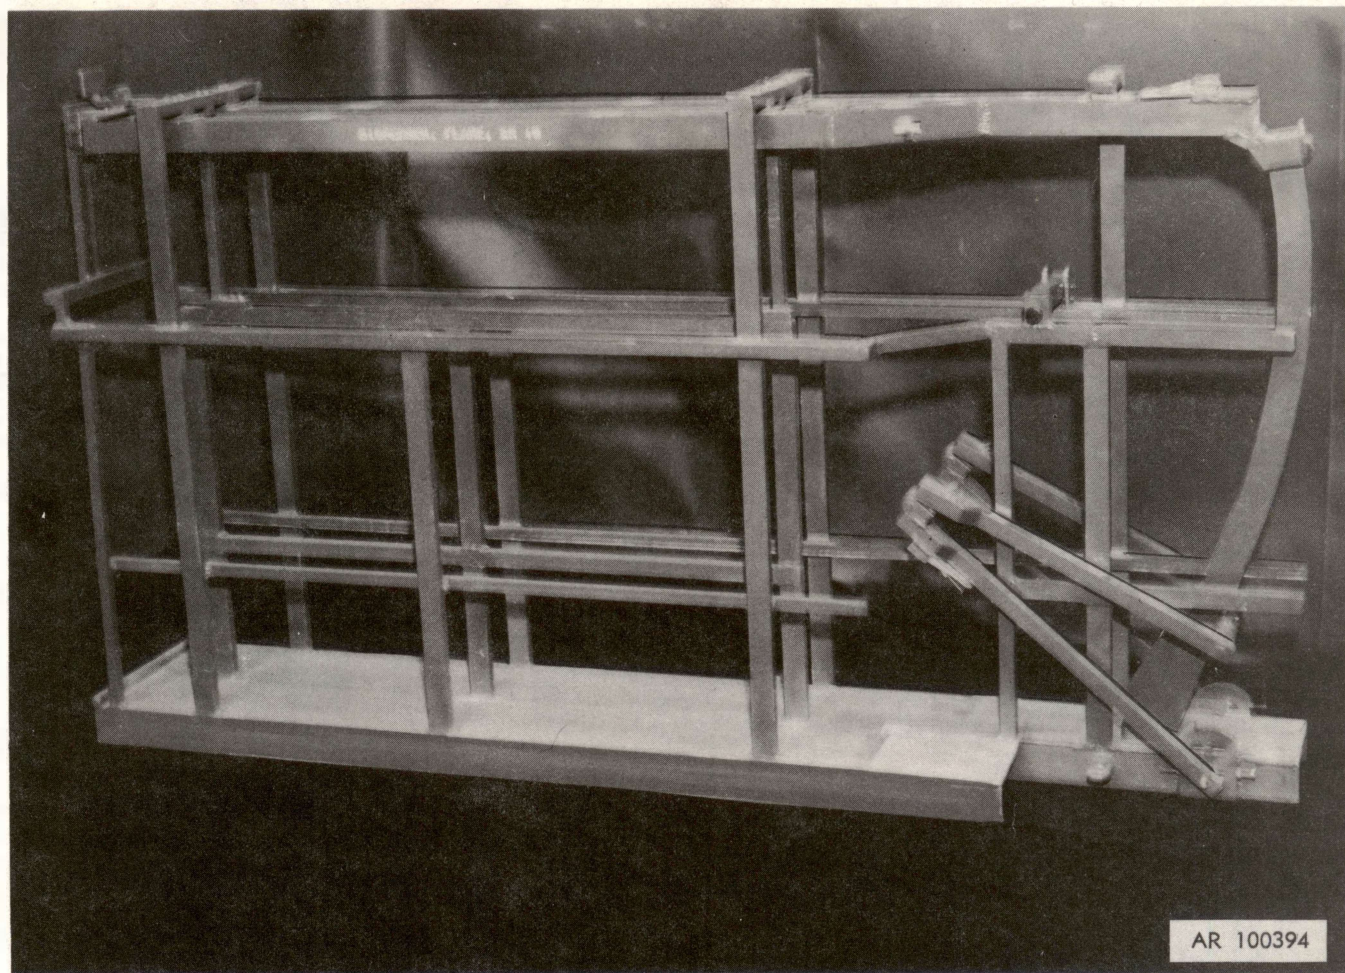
Dispenser assembly of flare dispenser XM19—snout retracted.
